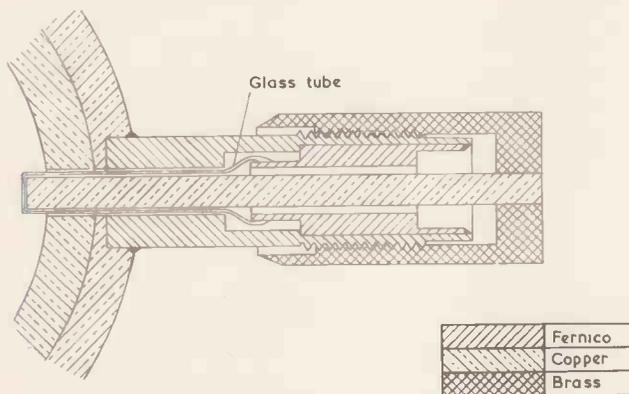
Tuner assembly with tuning rod outside envelope (Scale 1/16in = 1mm)
